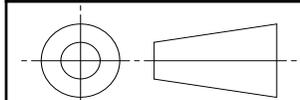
FITTING ASSEMBLY, ADAPTER
